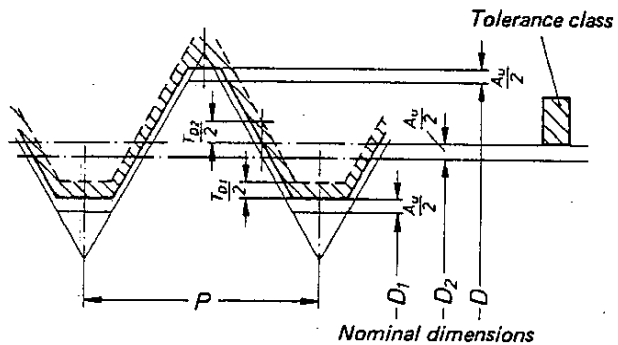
Nut thread with positive fundamental deviation (tolerance position G)
